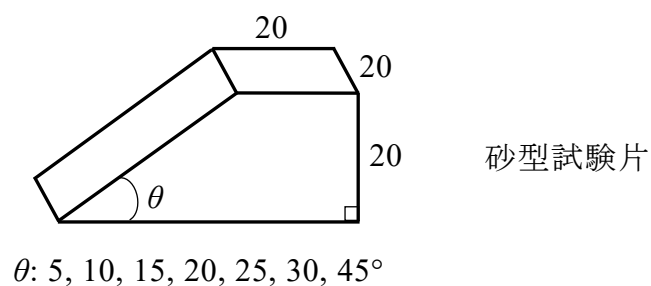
Shape of sand mold specimen (unit: mm).
